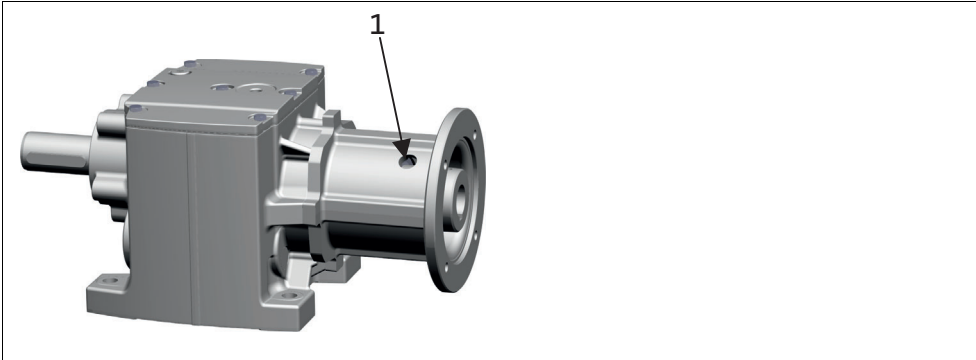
GNA standard motor with flange; position of the locking screw (1)
